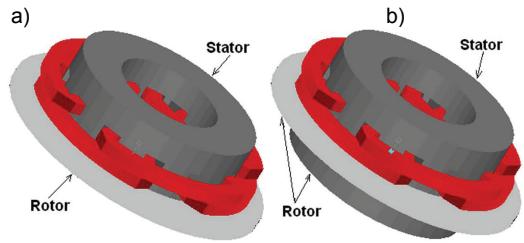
Different configurations of single-sided axial air-gap induction motors a) with a solid iron rotor and b) with a double-layer aluminum-solid iron rotor [13].
